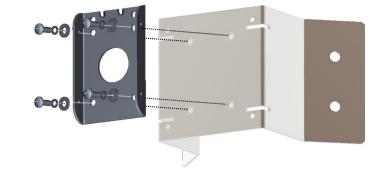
Corner Mount (right) w/ Mount Bracket (left) from 2020WMA-1 Wall Mount
